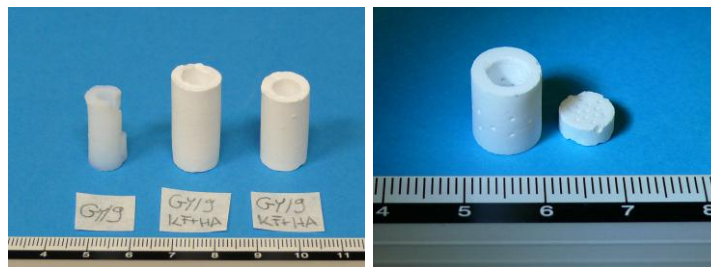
Mold-casting technique of HA-TCP-silica composite resulted in tubular specimens, which were machined after a 1000 °C sintering. A second heat treatment at 1050 °C gives of high mechanical strength hard materials, which hold 300 micron channels in designed arrangement and orientation.
